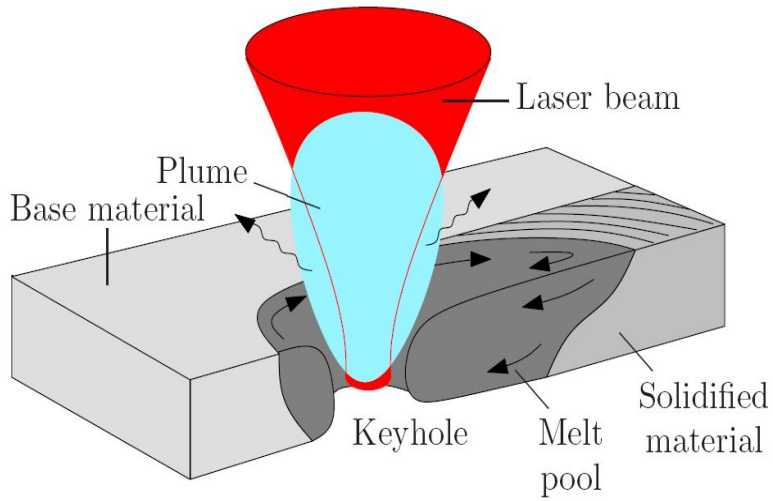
Schematic cross section of the full penetration keyhole laser welding process of a thin sheet.
